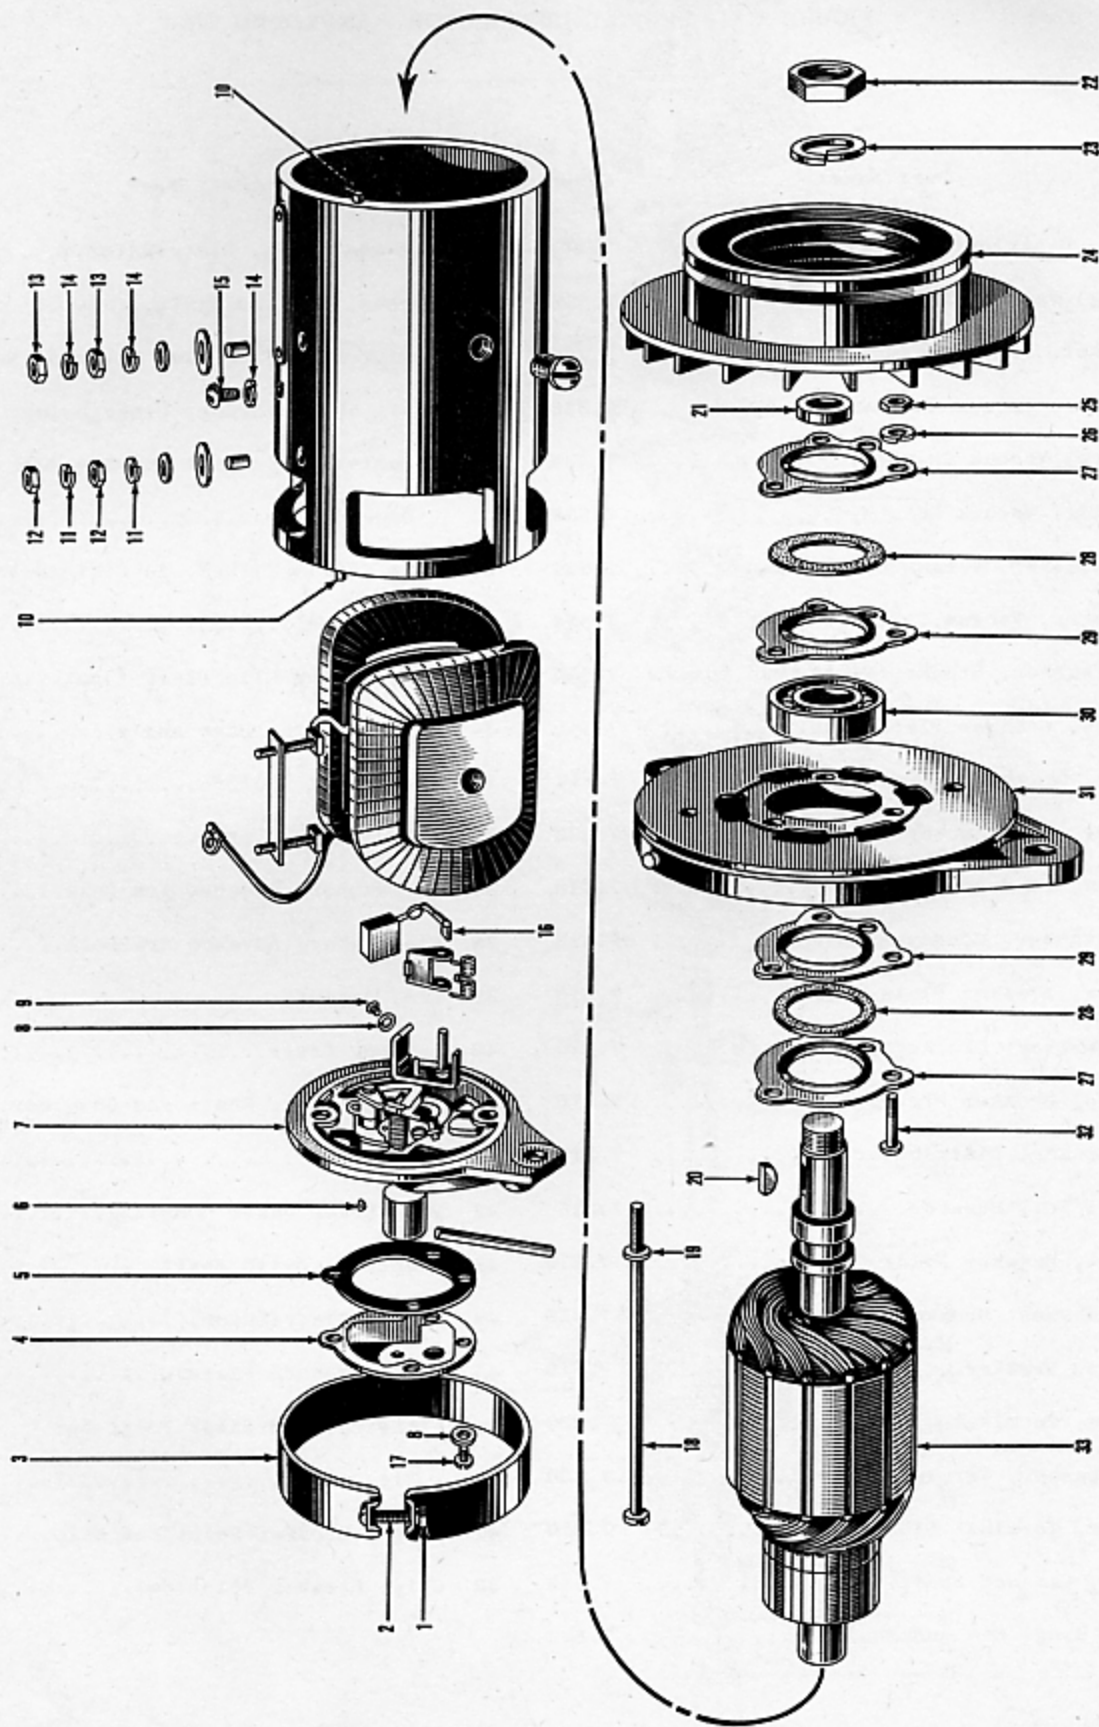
TYPICAL GENERATOR - EXPLODED VIEW
